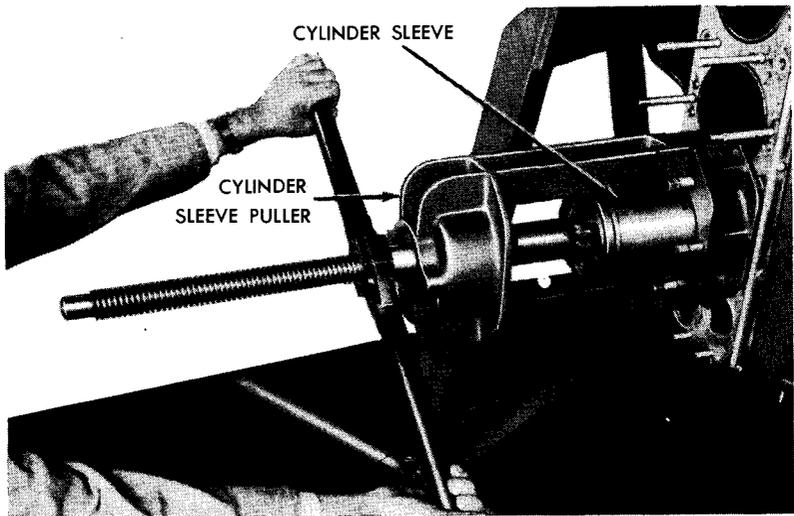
Removing Cylinder Sleeves, Using Replacer
